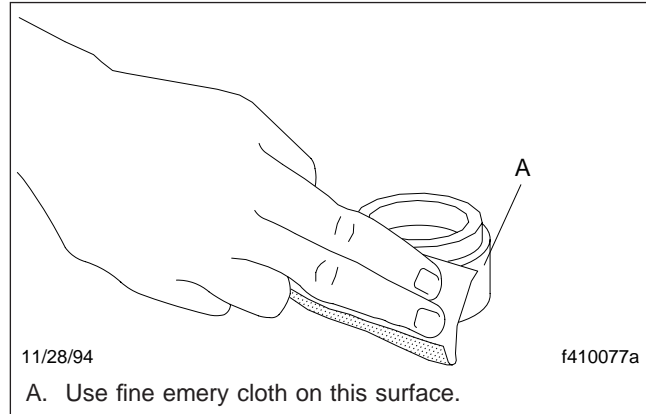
, Smooth a Half-Round End-Yoke U-Joint Bearing Cup
